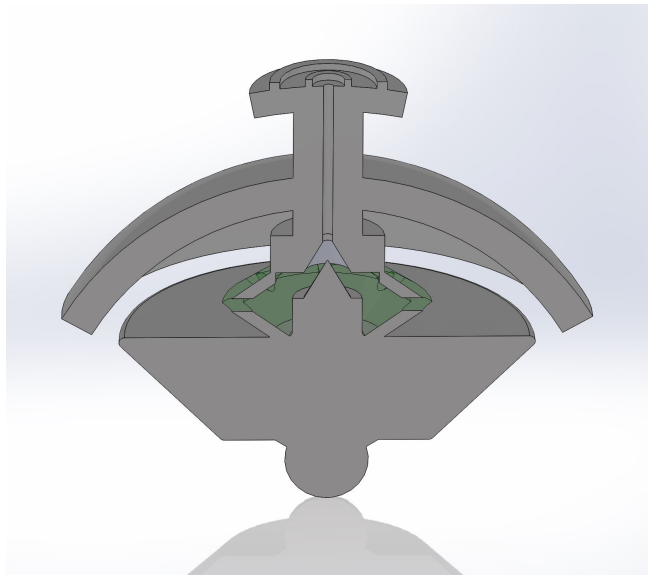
Section view of the non-assembly design. The spring, indicated by transparent green, is made from elastic material.
